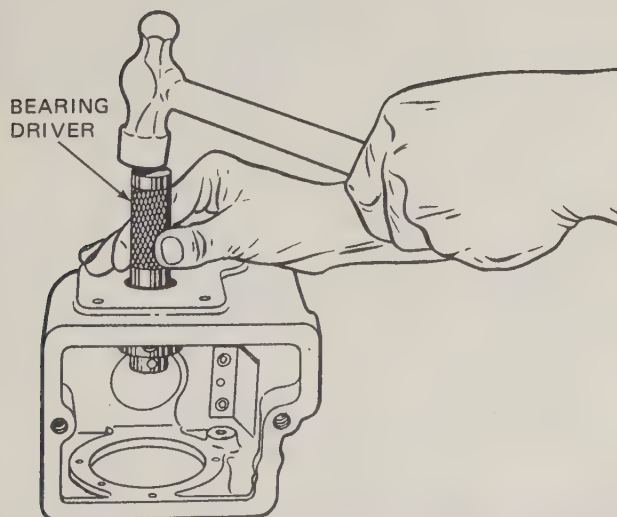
Use of a bearing driver to remove or replace a sleeve bearing. (Clinton Engines Corporation)
